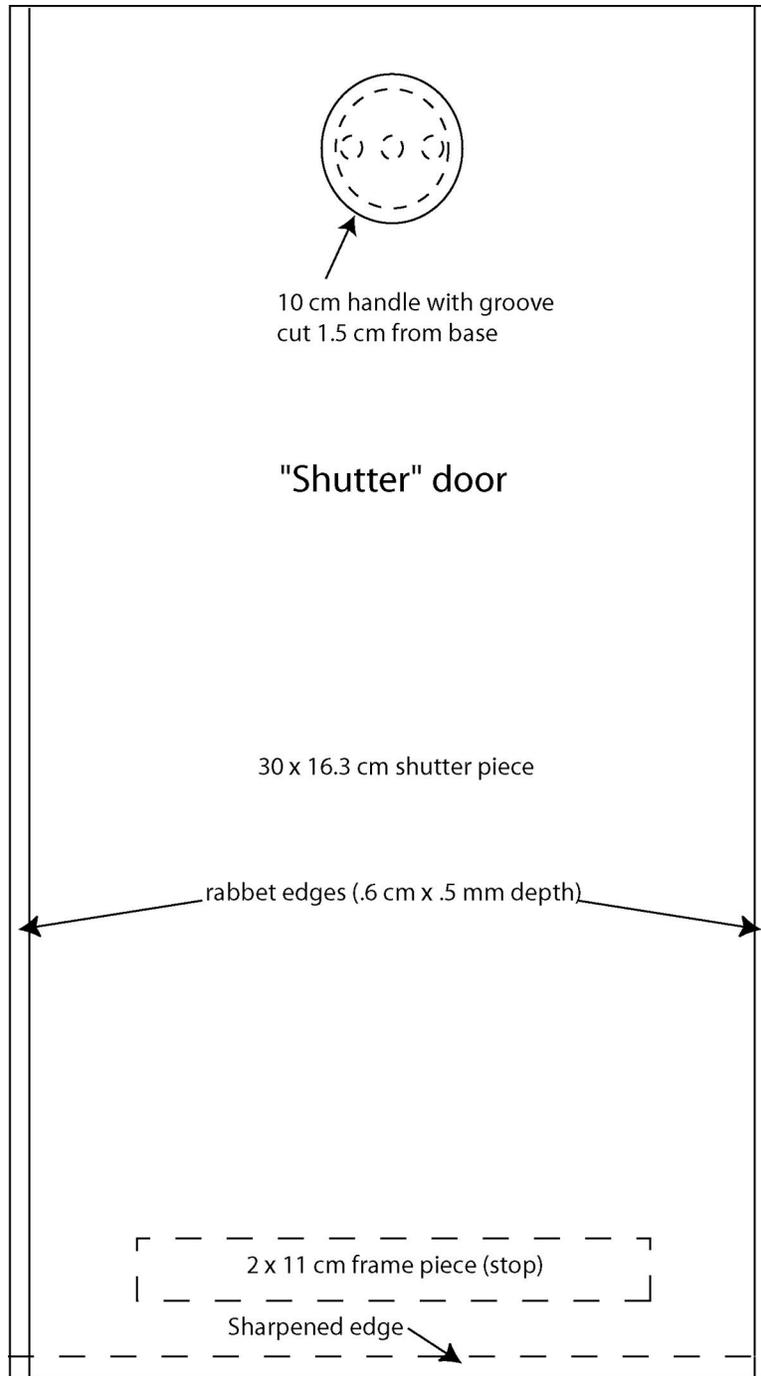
Shutter door with a sharpened cutting edge on one end and handle on the other. The shutter body has a stop piece glued to it on the opposite side to which the handle is attached. The handle is attached with 3 stainless Philips head counter sinking screws. The shutter body has counter sunk holes to accept these screws. Rabet edges 0.6 cm from the edge on the same side of the handle.
